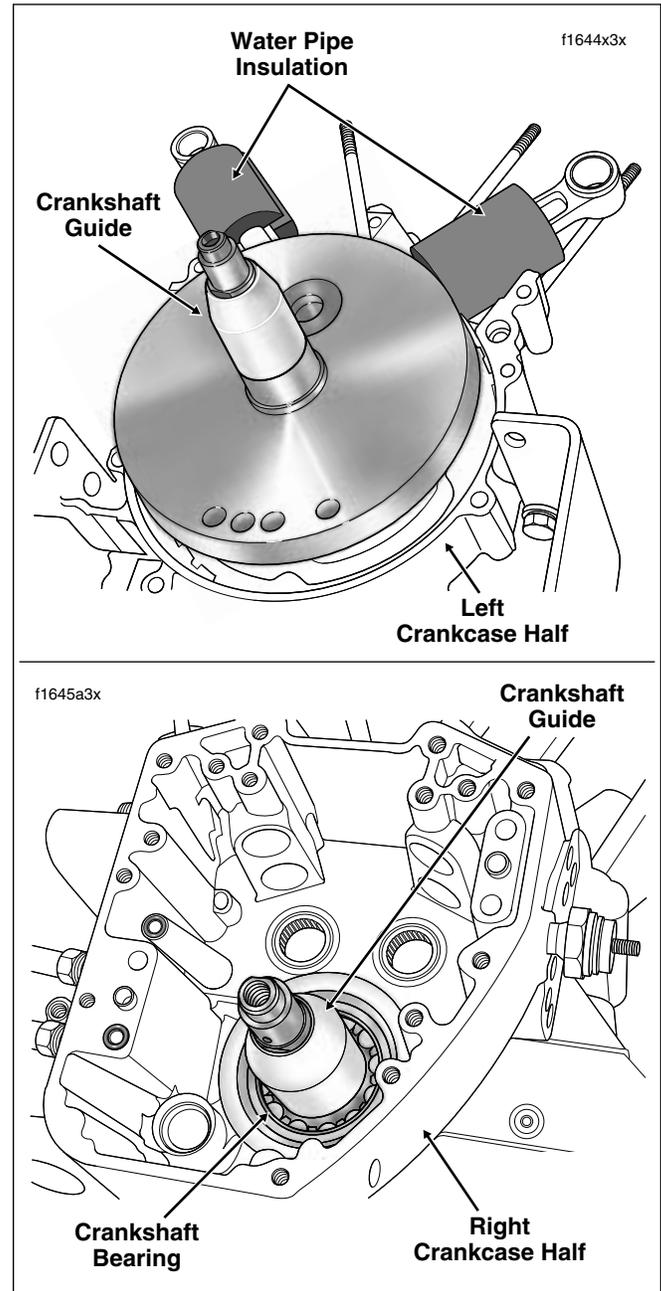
Install Crankshaft Guide to Protect Crankshaft Bearing
